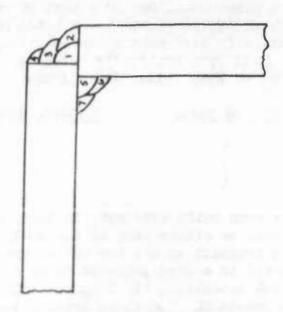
Cross Sectional View of Conventional Incomplete-Weld-Penetration Joint.
